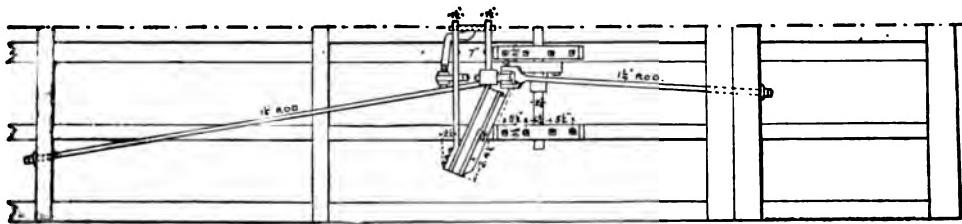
THE FLANGER IN INVERTED PLAN.
